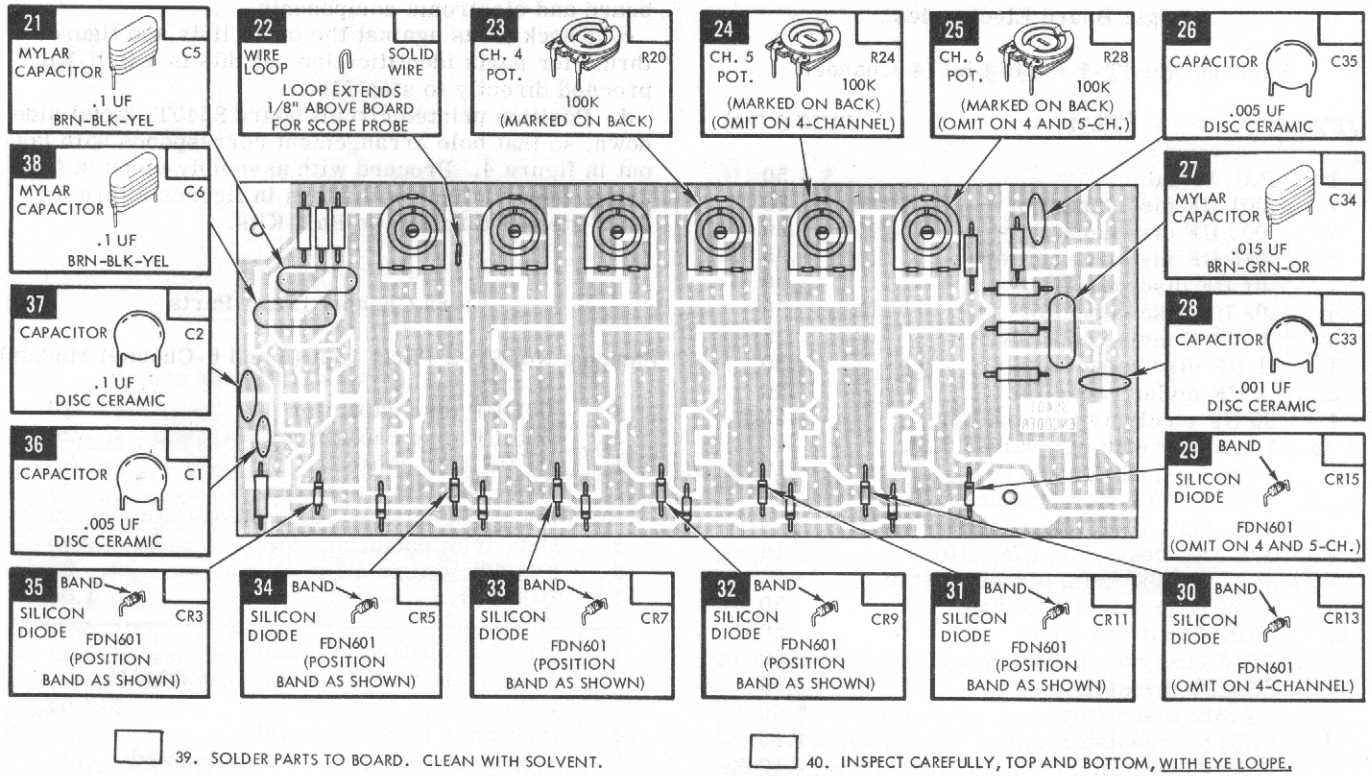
Logic Board Assembly (Sheet 2 of 6)
